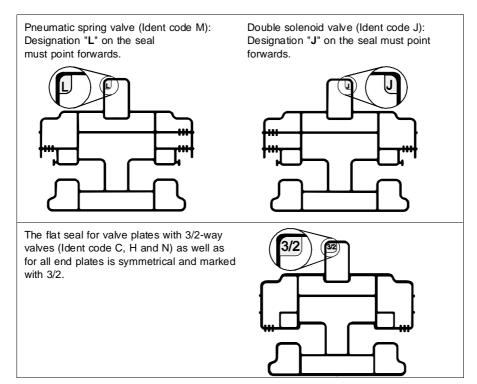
/3: Position and designation of seals with pneumatic spring valves or double solenoid valves (only CPV10/14 valve terminals)
